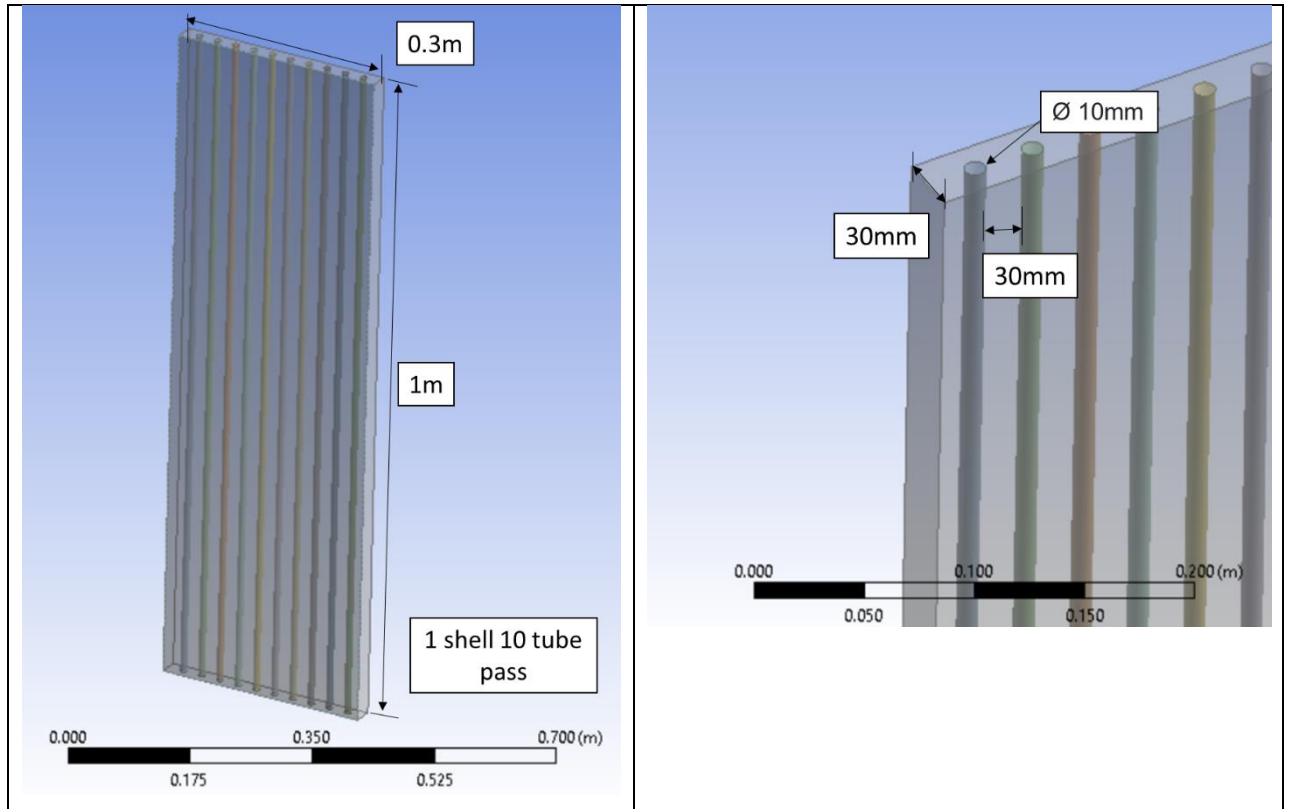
3-D design of air pre-cooler with 30mm pipe gaps
